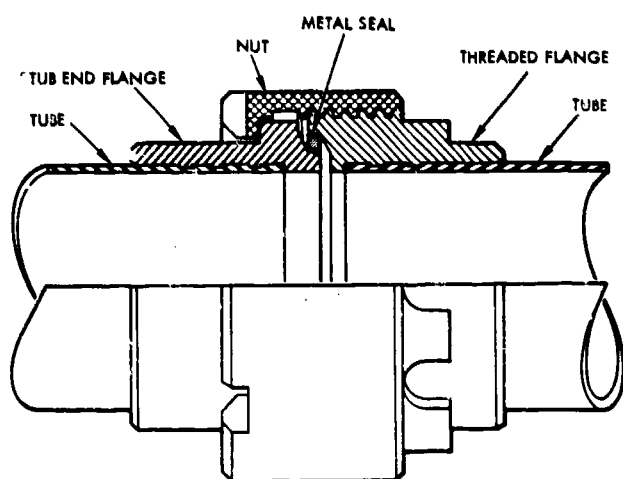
Gamah Connector, Showing Tube-to-Tube Connection
